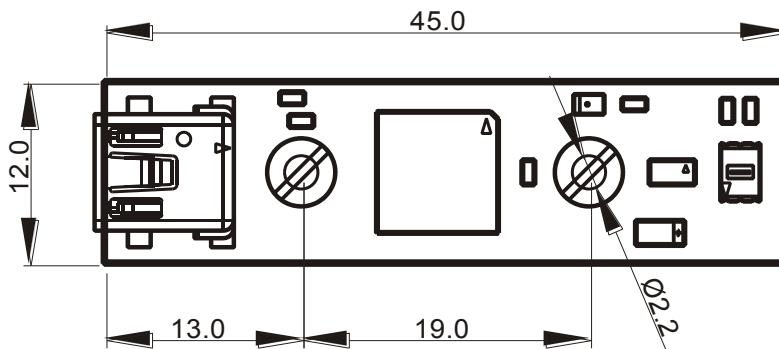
Mechanical dimensions of the Oak RGB sensor (Assembly drawing shows a different sensor)
